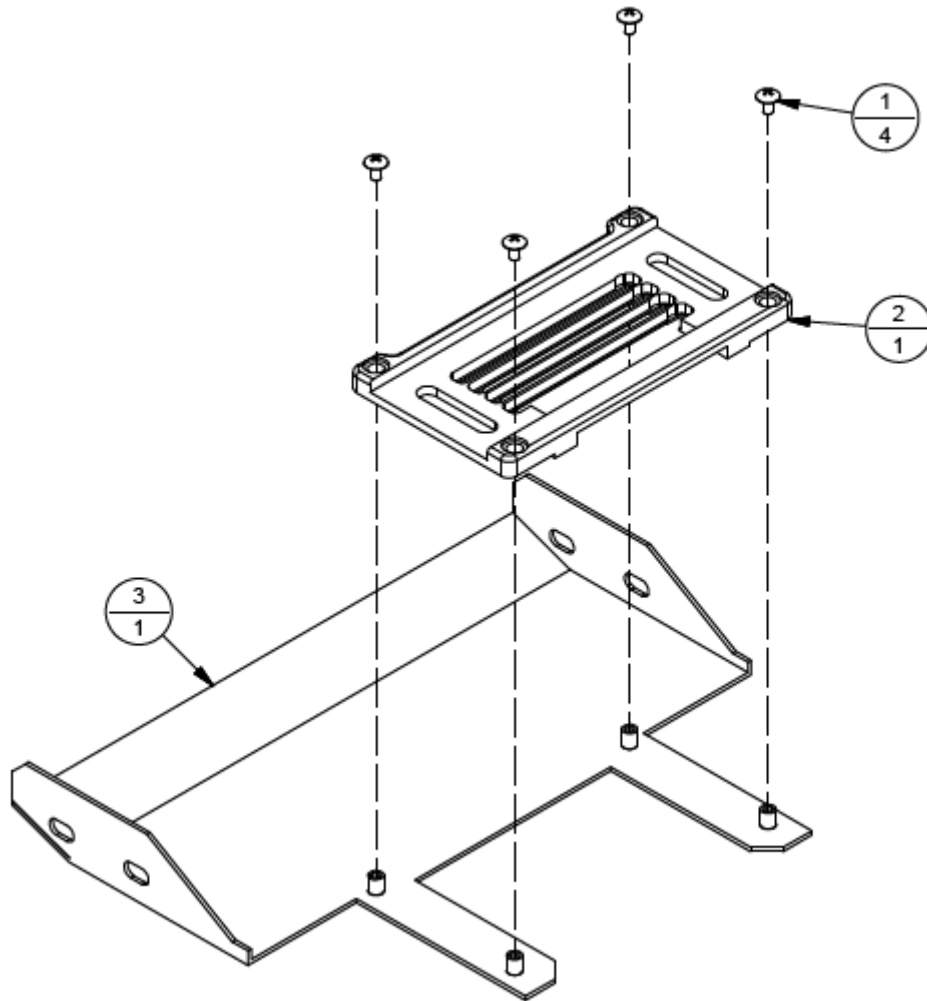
9107927A – Shoe Assembly, Atom 2500
